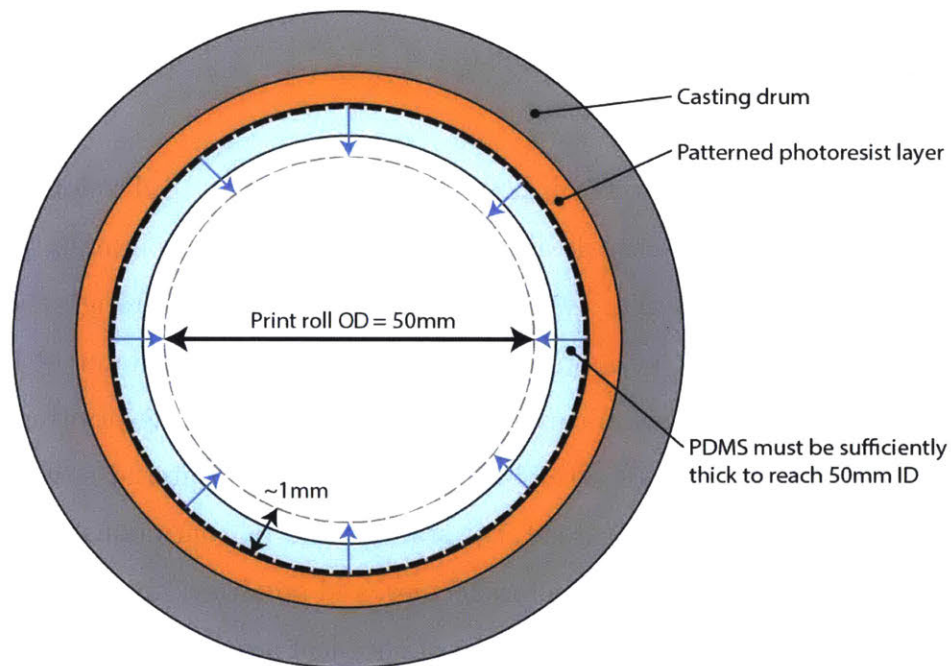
Dimensional constraints on the cylindrical casting process.* A cross-section of the drum during the fabrication of a seamless cylindrical stamp is shown. The stamp is created by casting material into a featured mold, until it closes in to the proper diameter. For typical experimental stamps, the wall thickness is approximately 1mm.
